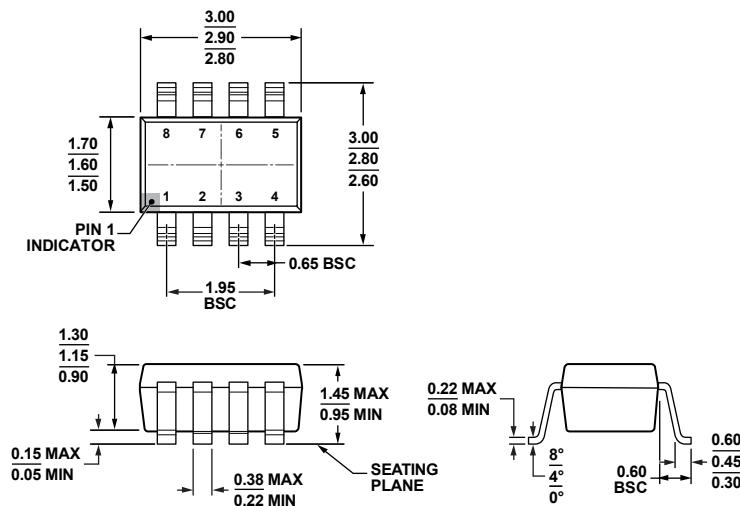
8-Lead Lead Small Outline Transistor Package [SOT-23]
